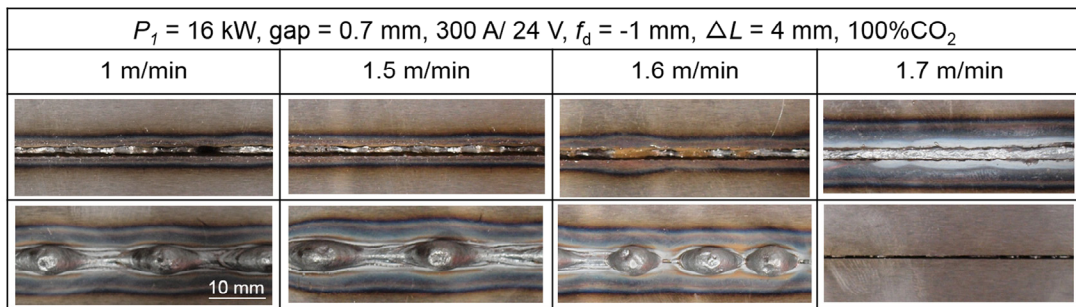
Surface appearances of weld beads produced by laser-CO₂ arc hybrid welding at various welding speeds.
